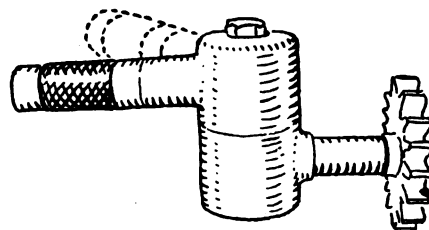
Swivelling drive connection of the Stewart instrument showing its range of movement.
